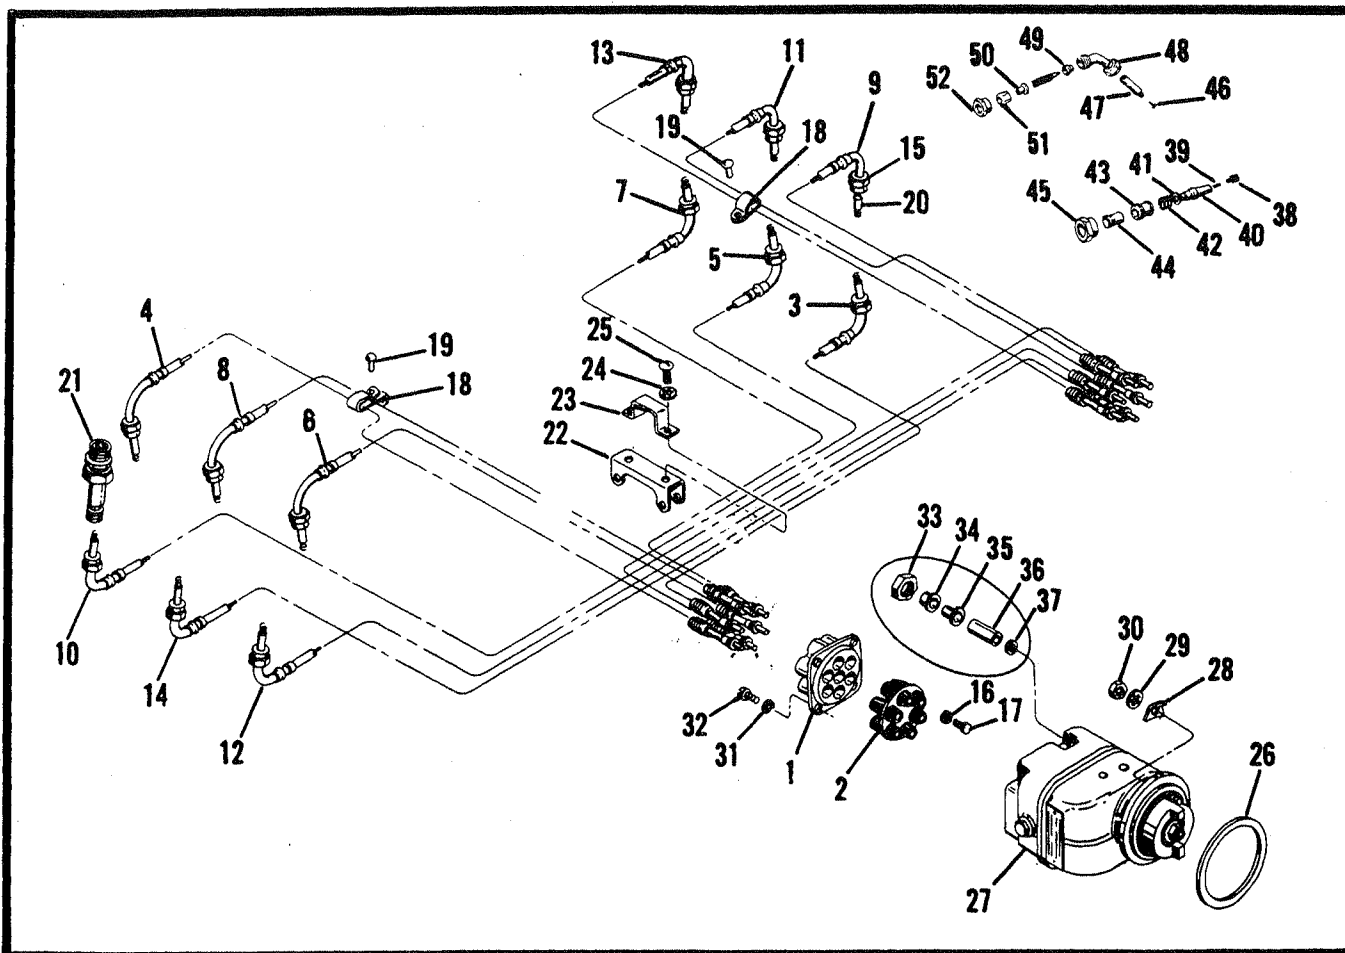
EXPLODED VIEW OF IGNITION SYSTEM
